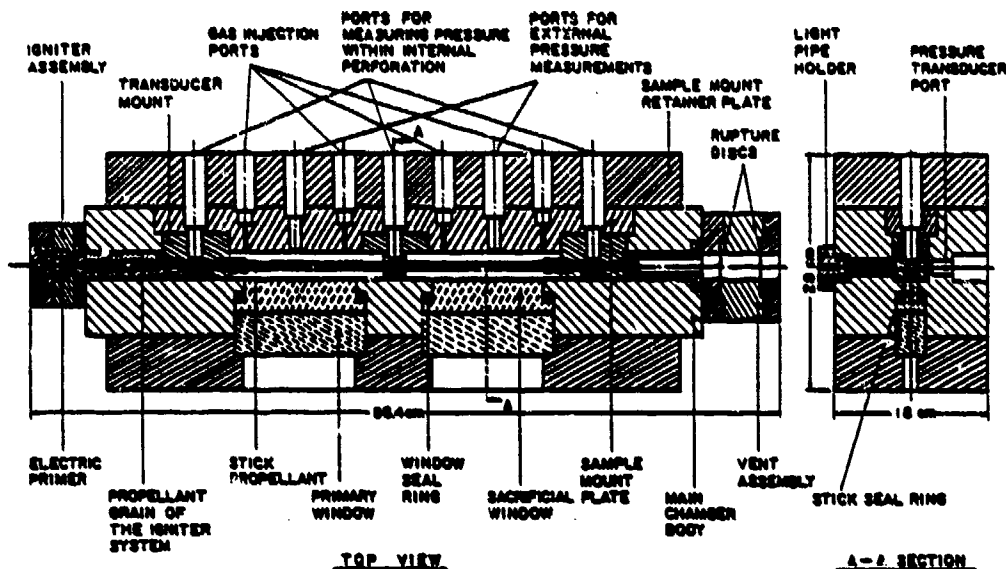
Schematic Diagram of Test Rig Assembly for Studying Combustion and Fracture of a Single-Perforated Stick Propellant
